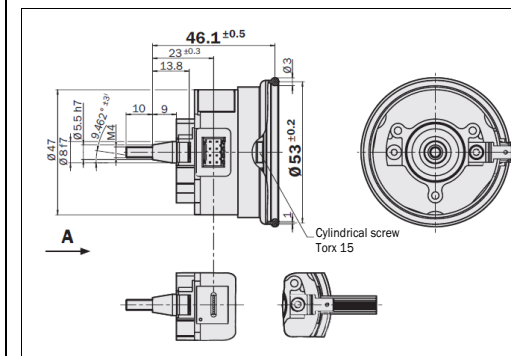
Dimensional drawing of SRS50S/SRM50S, conical shaft, rubber support
